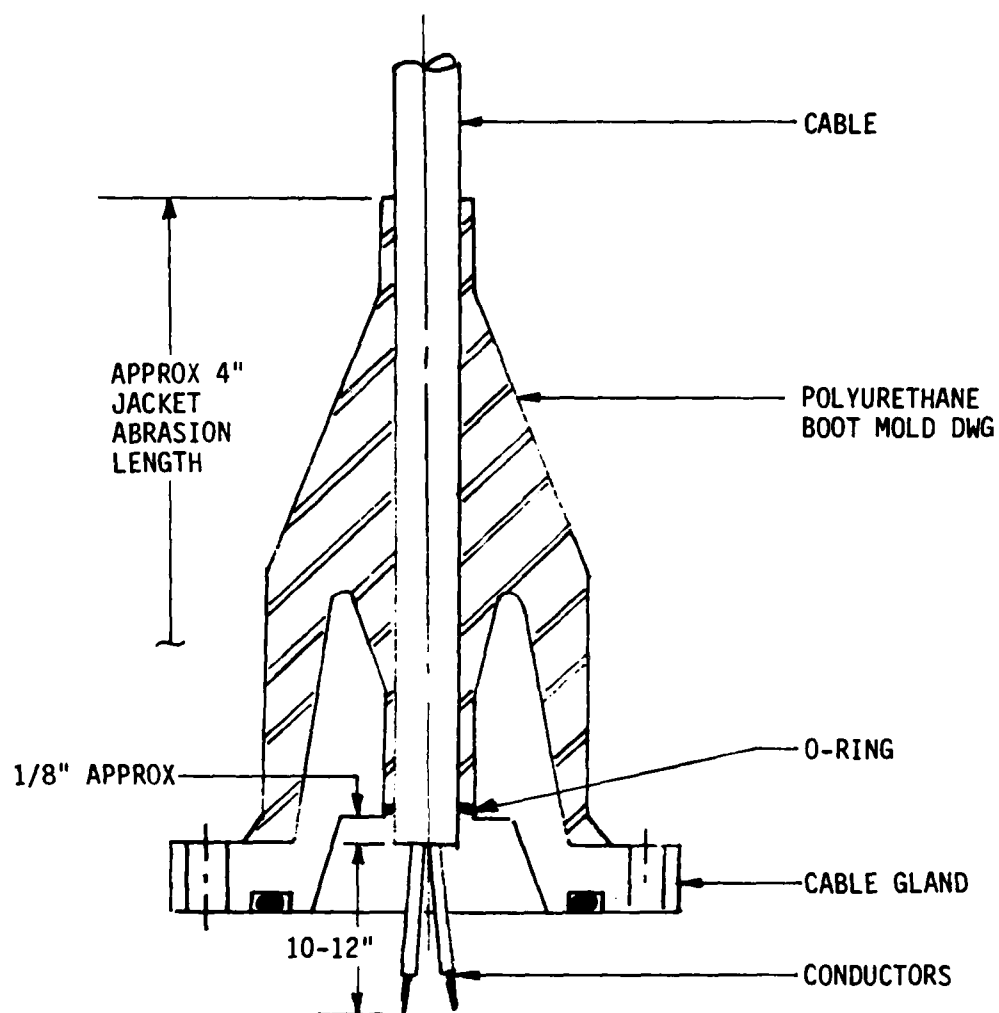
LOW FREQUENCY TRANSDUCER CABLE GLAND ASSEMBLY
